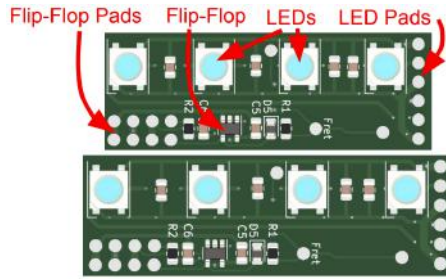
The small fretboard PCB (top) and large fretboard PCB (bottom).
